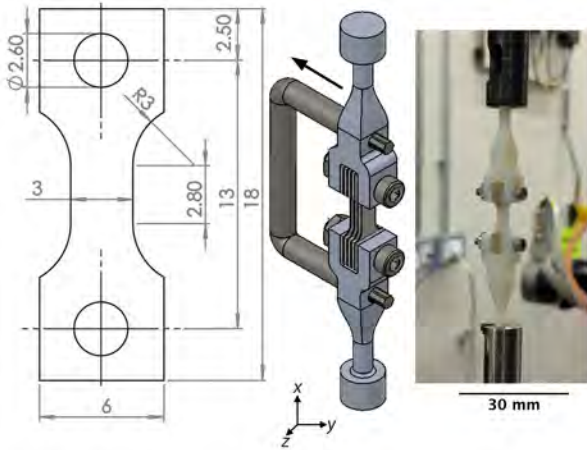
Specimen Preparation: (left) Schematic drawing of the tensile test specimen (units in mm); (middle) CAD drawing of the additively-manufactured grips with multiple specimens inserted and a U-shaped support bracket that was removed prior to mechanical testing; (right) Photo of Experimental setup on the I13 beam-line.
